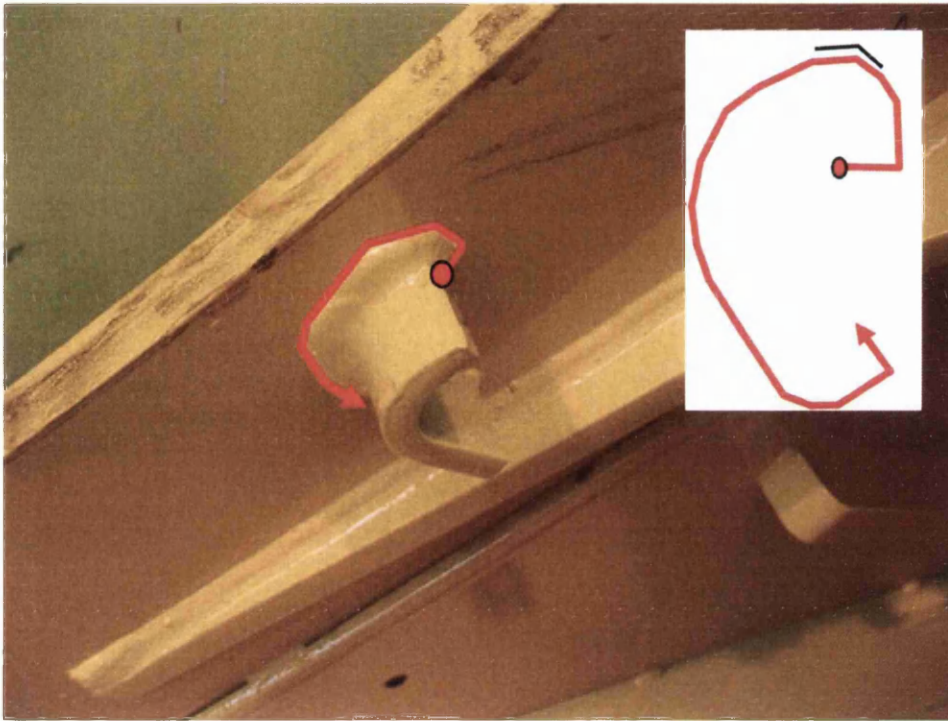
Lock lug attachment weld - structural stress weld line path at toe
